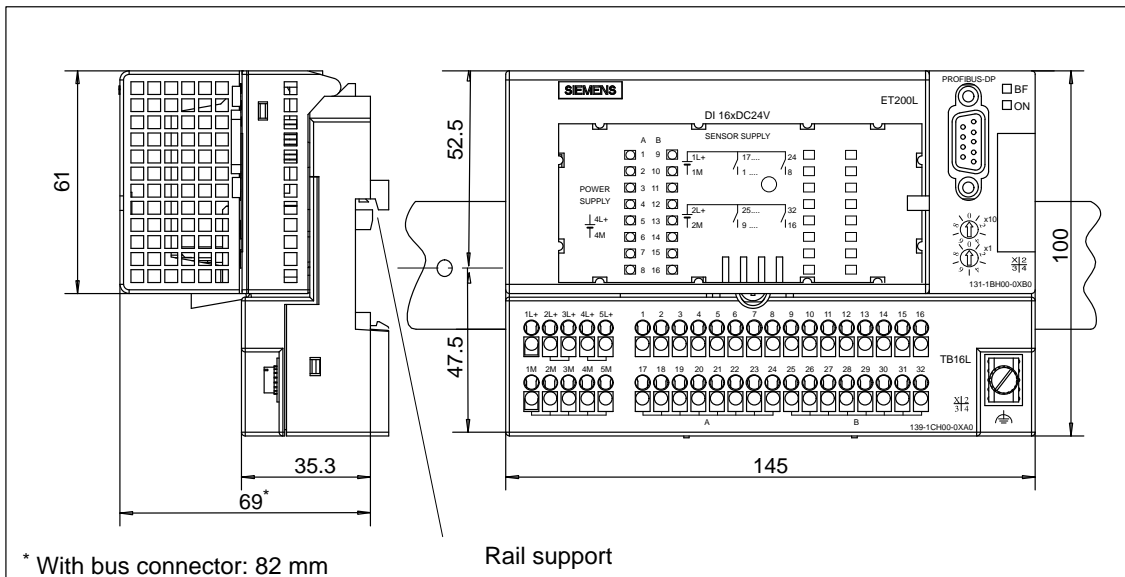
The TB 16L Terminal Block with the Electronics Block Clipped On, Dimension Drawing
